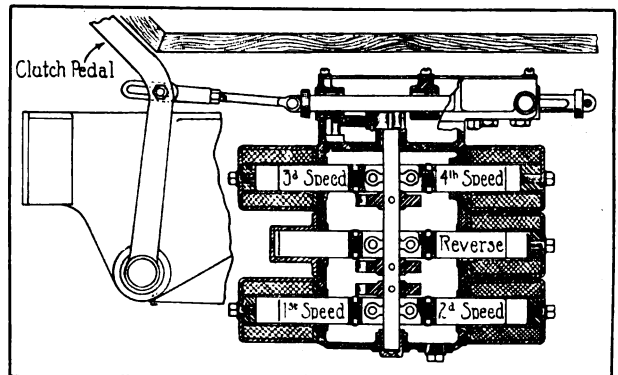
Sectional View of Vulcan Electric Gearshift, Showing Solenoids and Clutch Pedal Control of Knife Switch.
